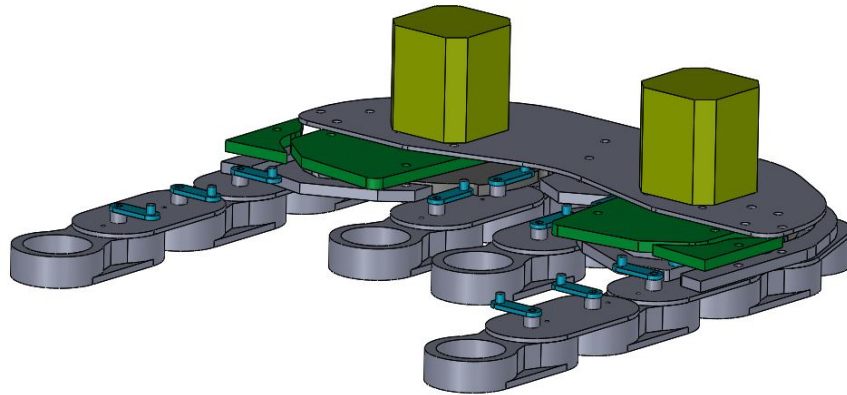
Isometric view of total design, with NEMA 17 stepper motors (yellow), locking cranks (blue) and the crank guide (green).
